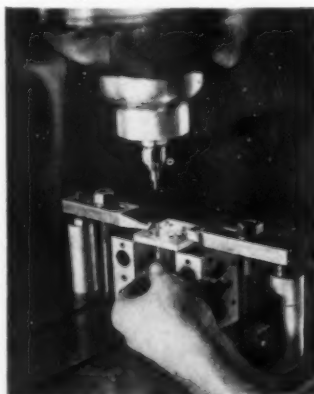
Workpiece is mounted high enough to permit measuring bottom as well as top of hole.
